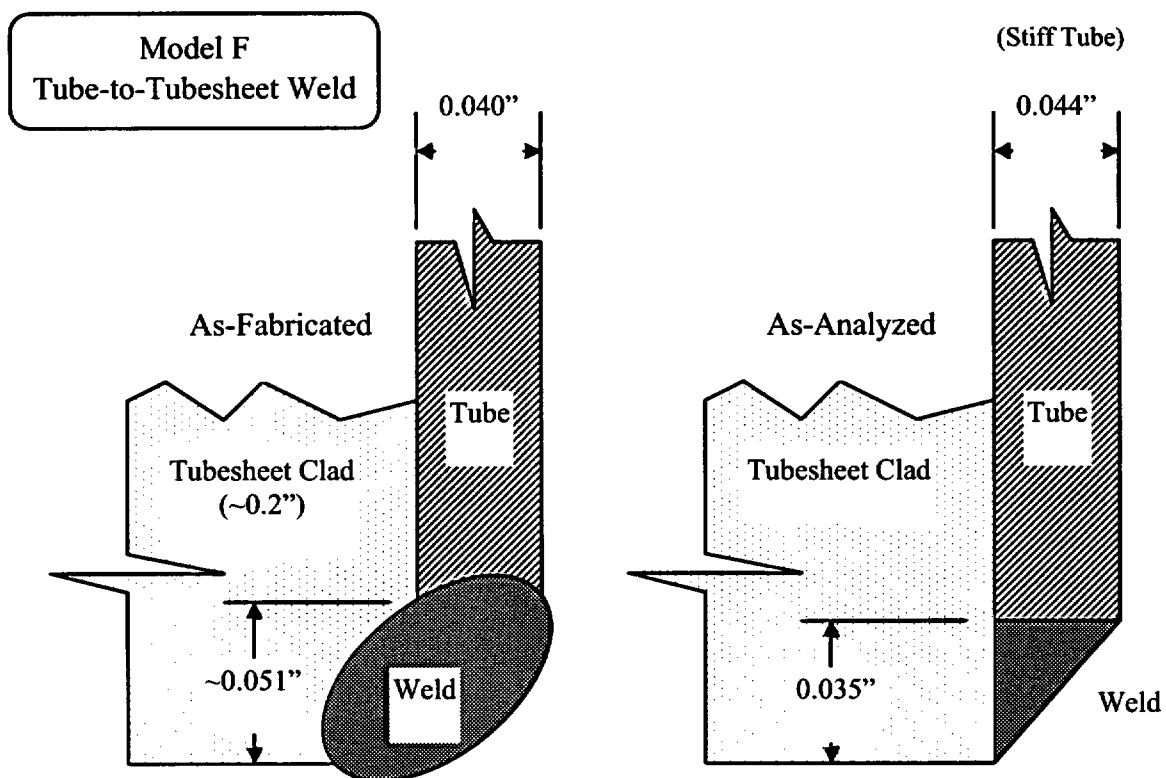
As-Fabricated & As-Analyzed Tube-to-Tubesheet Welds
